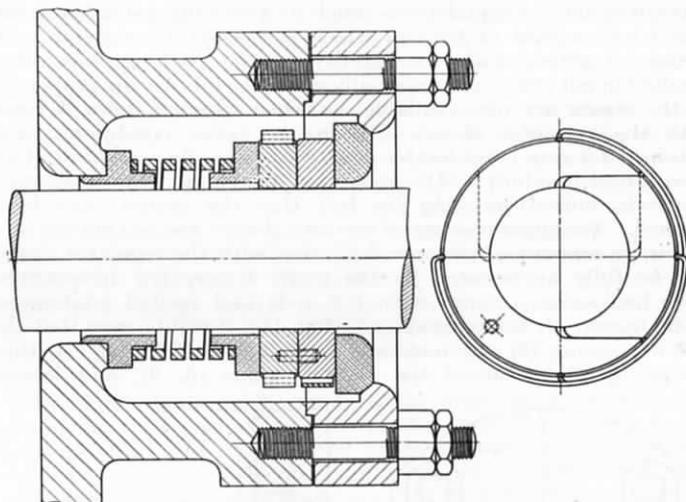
PACKING WITH CAST-IRON RINGS.
